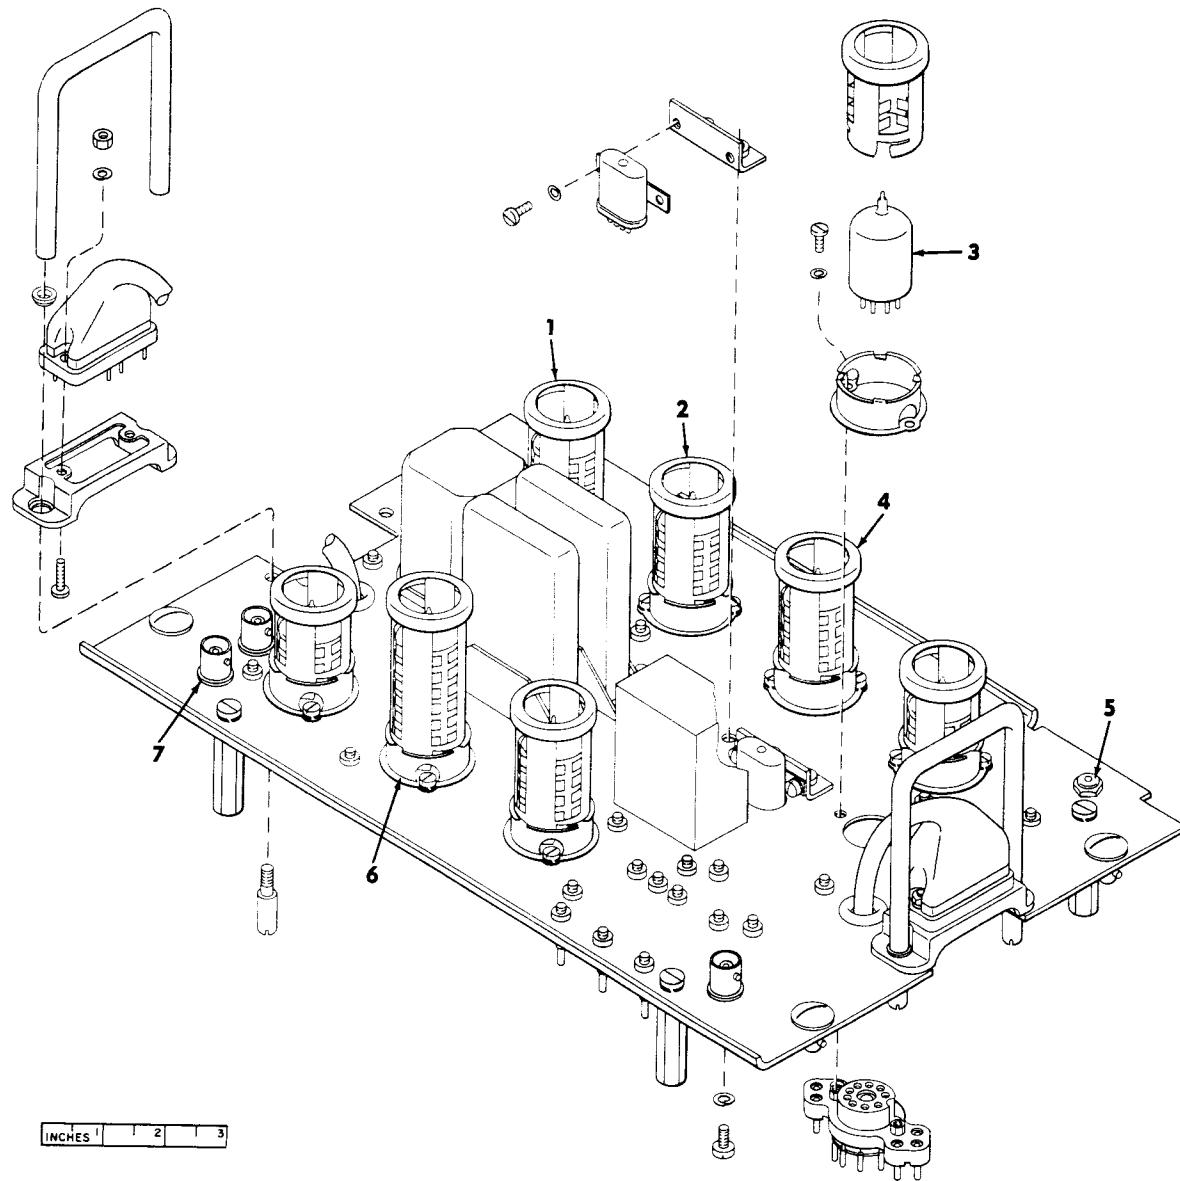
Synchronizer, electrical (9136696)—partial exploded view
